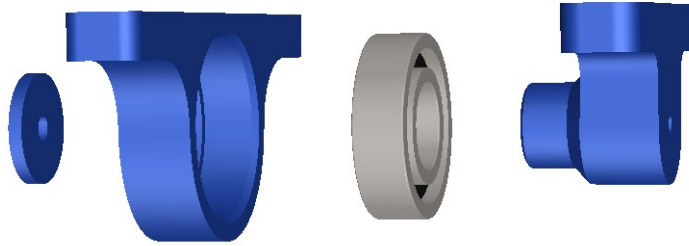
Exploded view of the joint between the front and the rear part of the robot.
